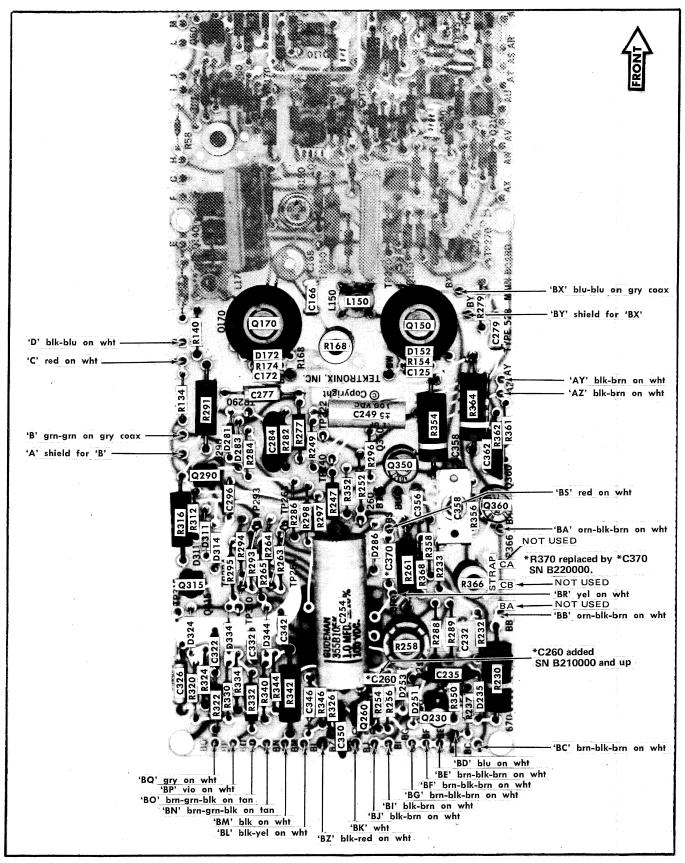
Partial top view of Main board showing components and wire color codes for instruments SN B080560 and up.
